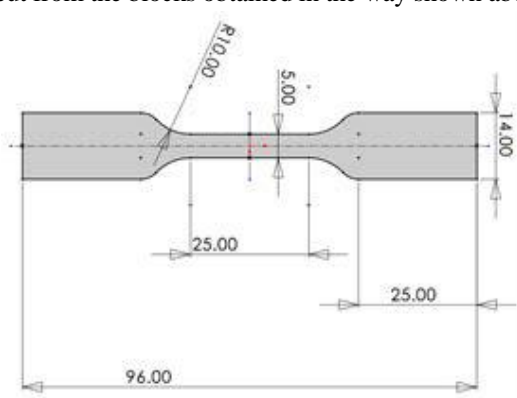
Shape and dimensions of uniaxial tensile strength test specimens
